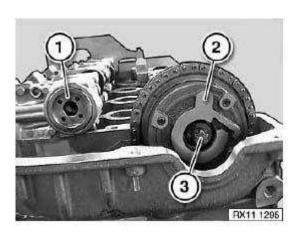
Identifying Inlet Camshaft And Exhaust Camshaft Courtesy of BMW OF NORTH AMERICA, INC.
